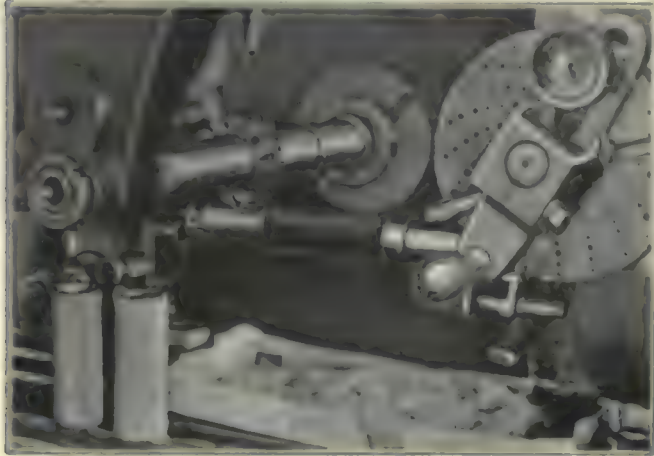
MILLING THE GROOVES IN AN AIR-DRILL HANDLE
